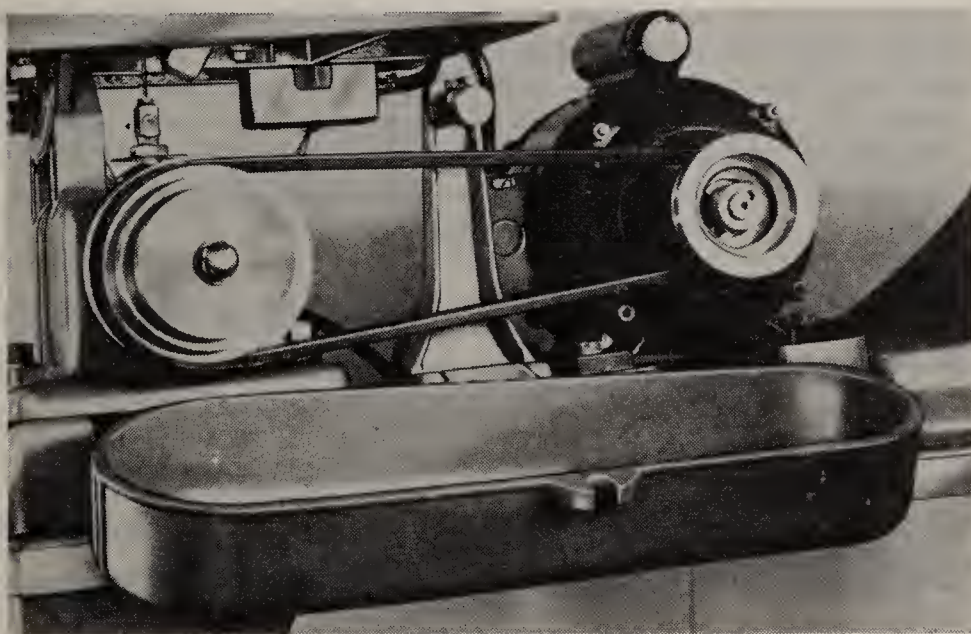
Driving gears and table assembly of a typical jigsaw.
